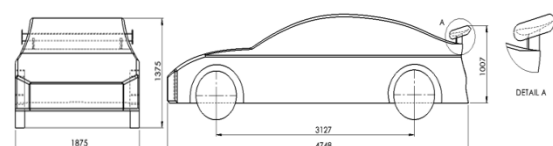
Dimensional illustration of CAD Model 2 and Selig 1223 wing spoiler shape
